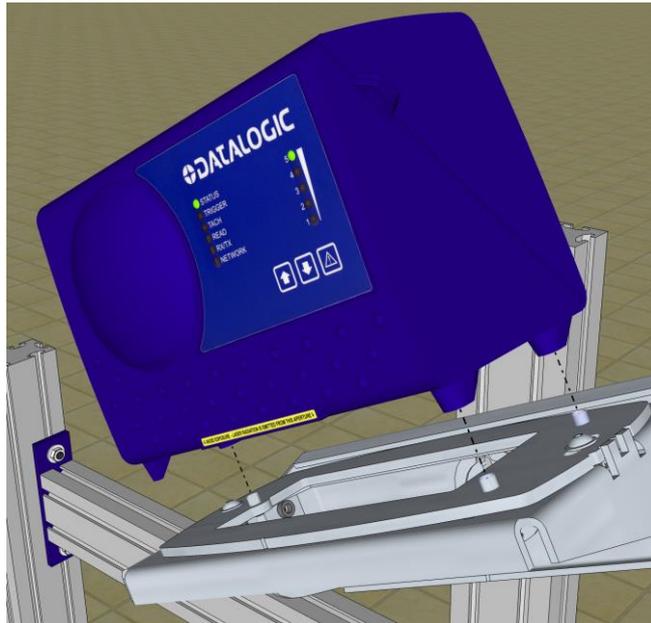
Placing the DM3610 on the positioning posts of the UMB Mounting Plate
